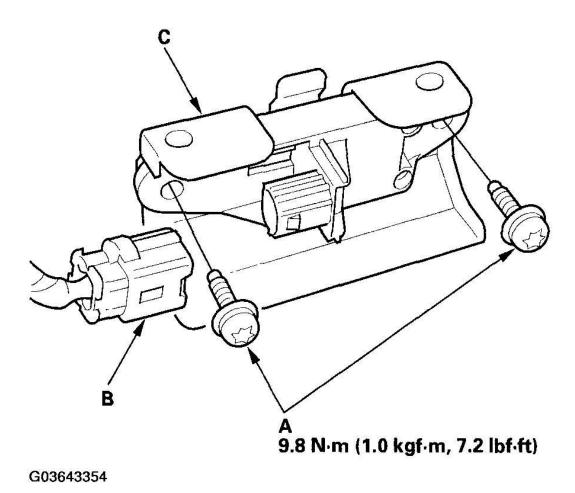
Connecting SRS Left Side Subharness 2P Connector To Roll Rate Sensor Courtesy of AMERICAN HONDA MOTOR CO., INC.
